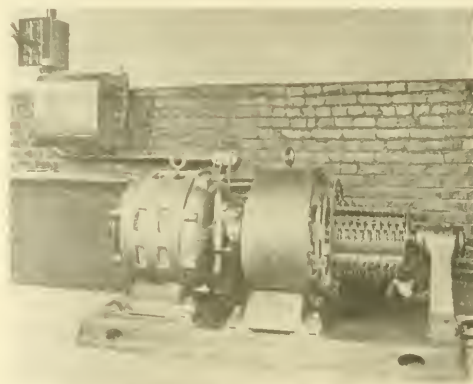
MULTIPLE-OPERATOR WELDING EQUIPMENT
